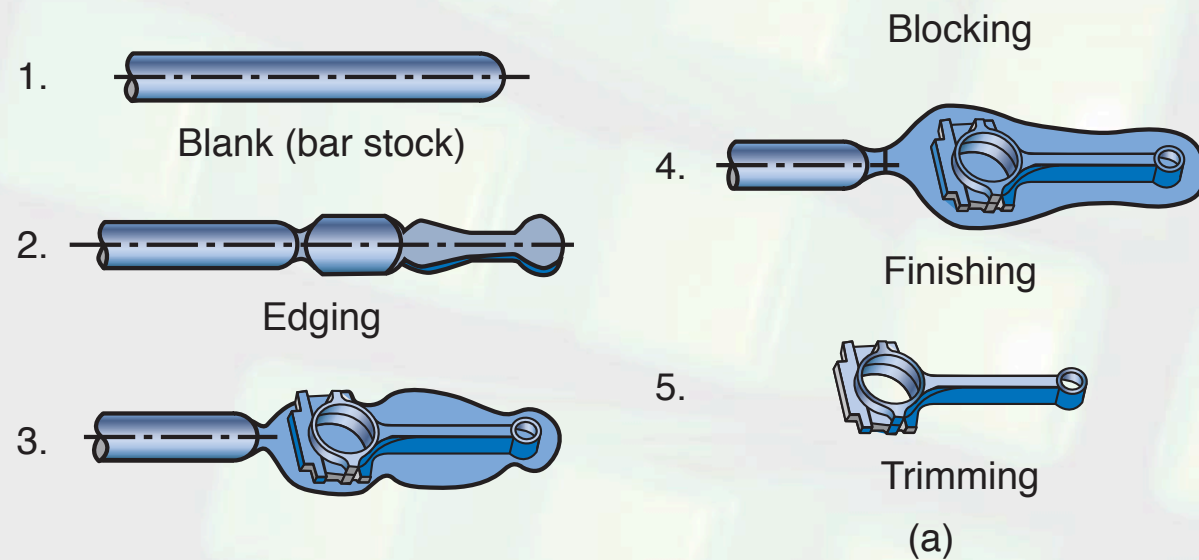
Stages in forging a connecting rod for an internal combustion engine. Note the amount of flash developed, which is important in properly filling die cavities.
